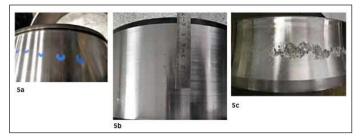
Examples of typical bearing types that can be affected: a) tapered roller bearing; b) cylindrical roller bearing; and c) spherical roller bearing.
